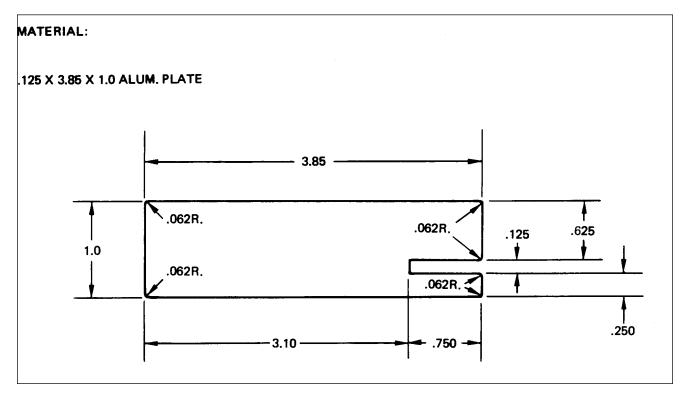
Fabricated Aileron Bellcrank Rigging Tool
